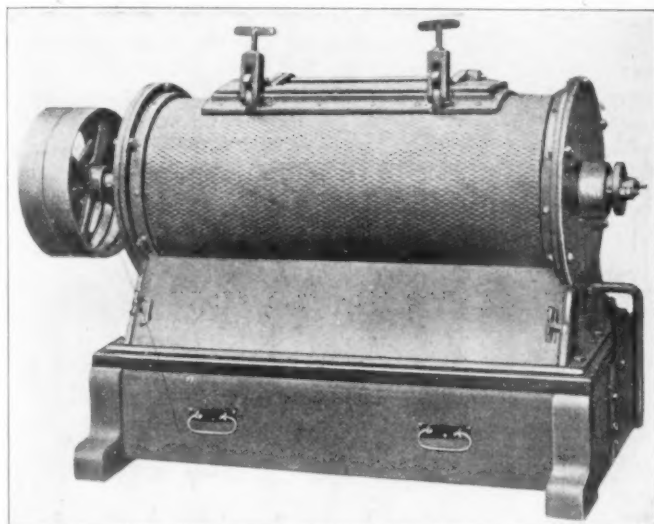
HORIZONTAL POLISHING MACHINE FOR POWDER.
